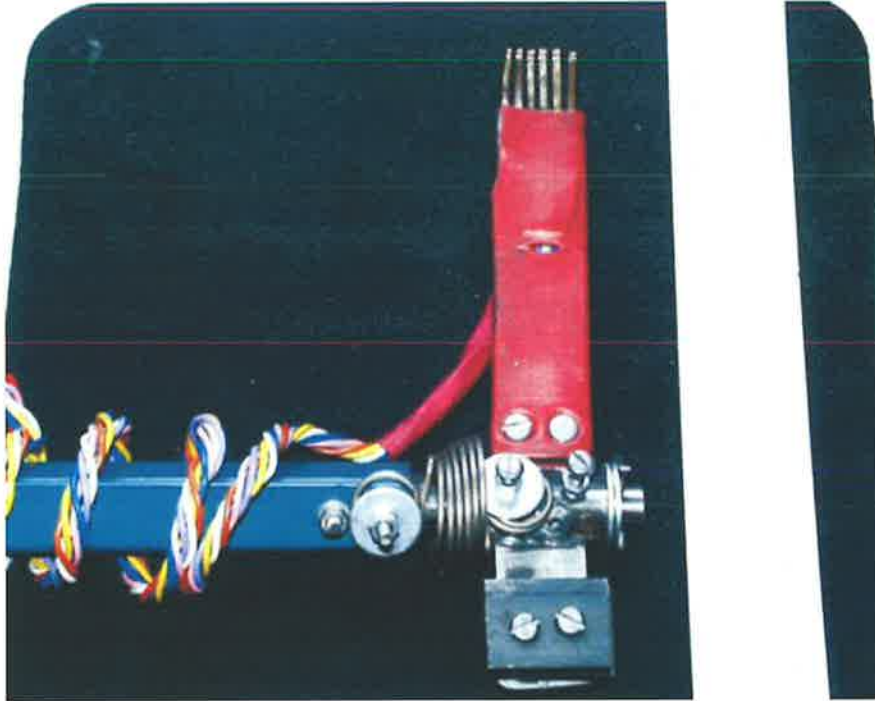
Pivot mechanism employed for the arm supporting the brushes. This enabled the brush arm to make continuous contact with slip ring over the entire tool plunge distance.
